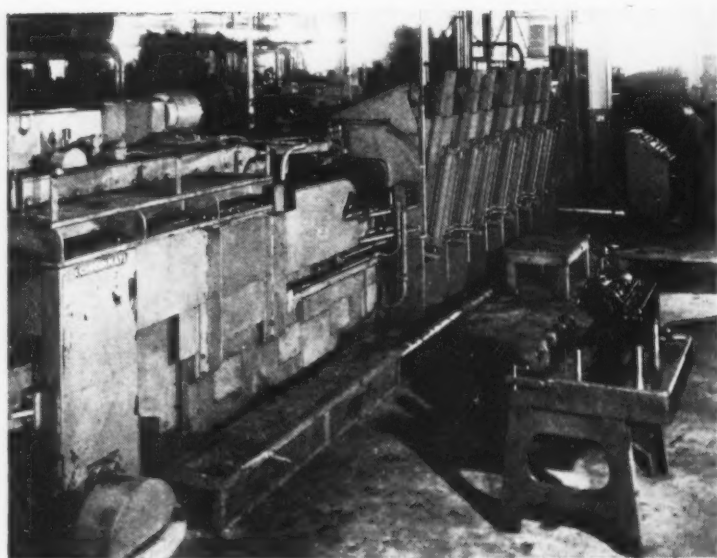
One man controls this automatic horizontal broaching machine. This 96-ft long machine broaches main bearing journals, main bearing locks and top and bottom faces of the engine blocks.
